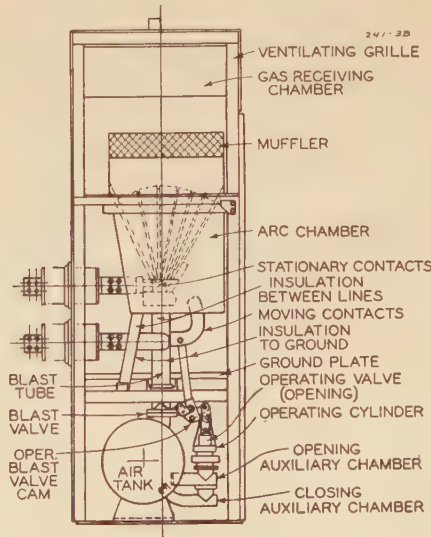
B (right). Sectional elevation showing side elevation of the breaker in Figure 3A
